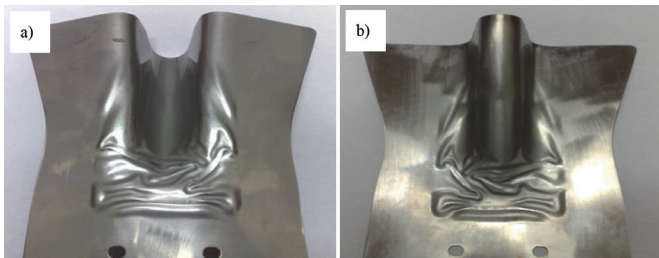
Experimental, real drawpiece formed in one operation rigid tools: a) view from above, b) view from below
